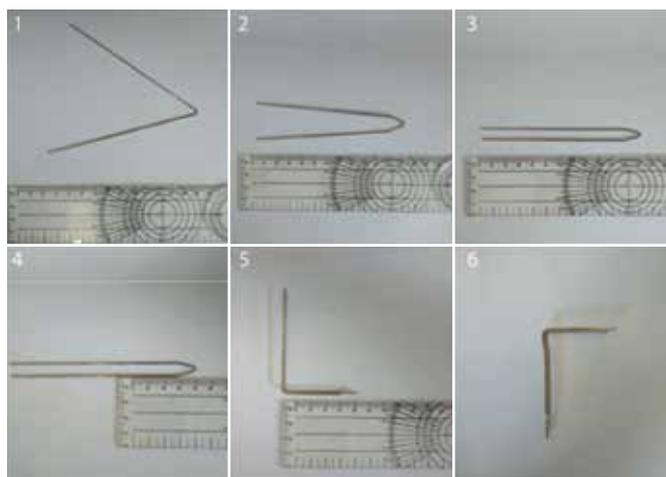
Molding of 1.0-mm and 1.2-mm Kirschner (K)-wires.
